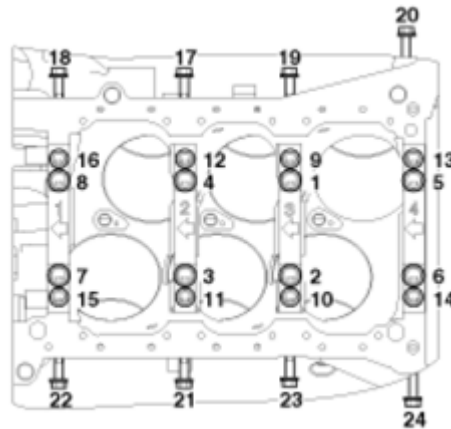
Main Bearing Cap Bolt Tightening Sequence
